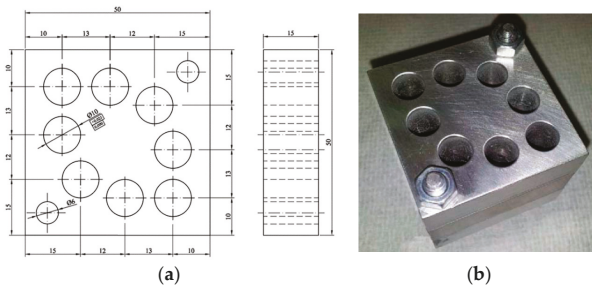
(a) Design of the geometry of each of the three parts of the workpiece; (b) Predrilled workpiece used during the trials to simulate hole repair operations on hybrid stacks [56,57].
